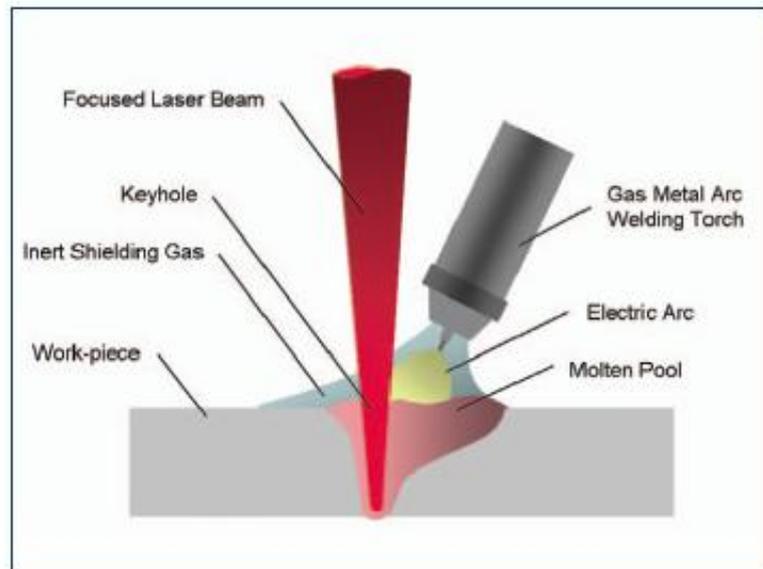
Hybrid laser arc welding process (laser leading) [4]
